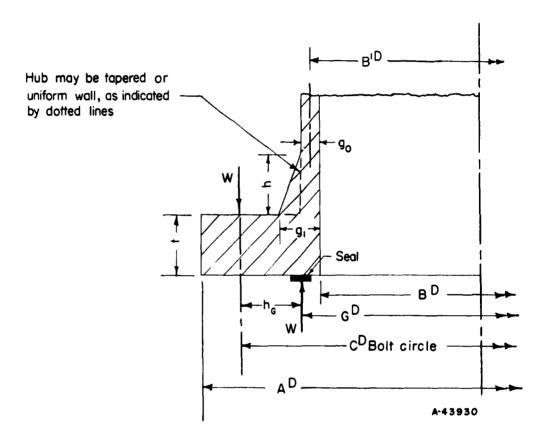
DIMENSIONS OF AN OUTWARDLY PROJECTING FLANGE ATTACHED TO A CYLINDRICAL SHELL
